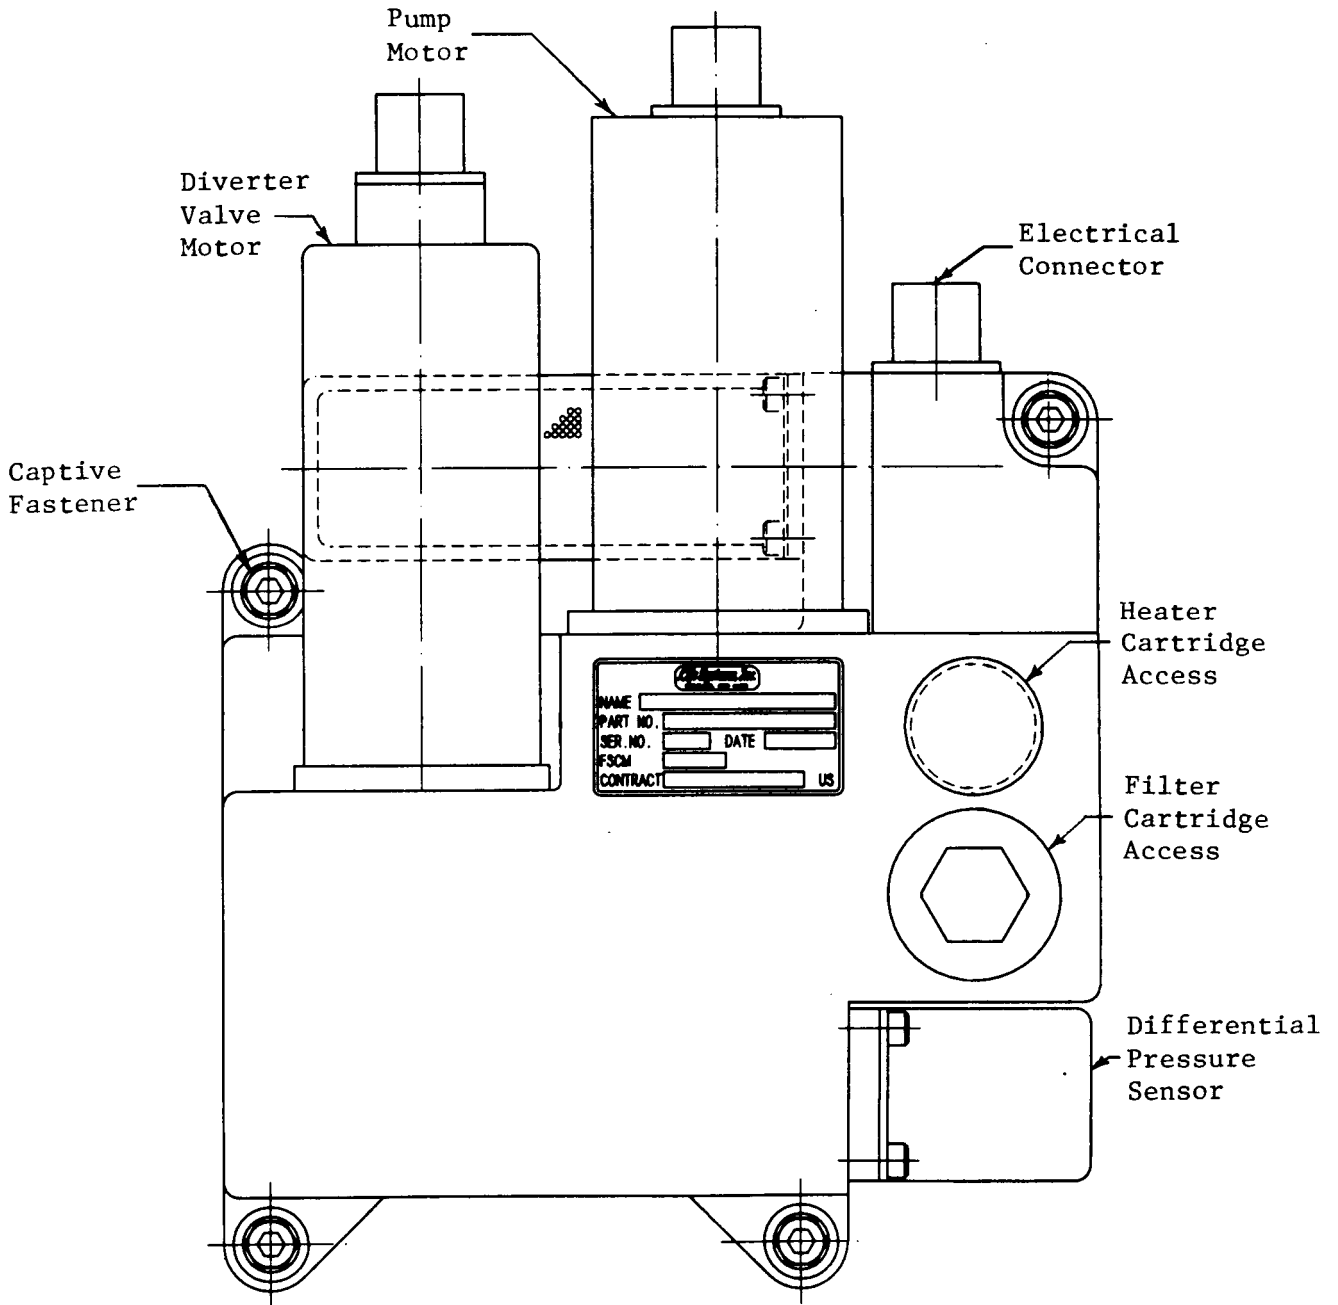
SCHEMATIC OF TCA - FRONT VIEW
